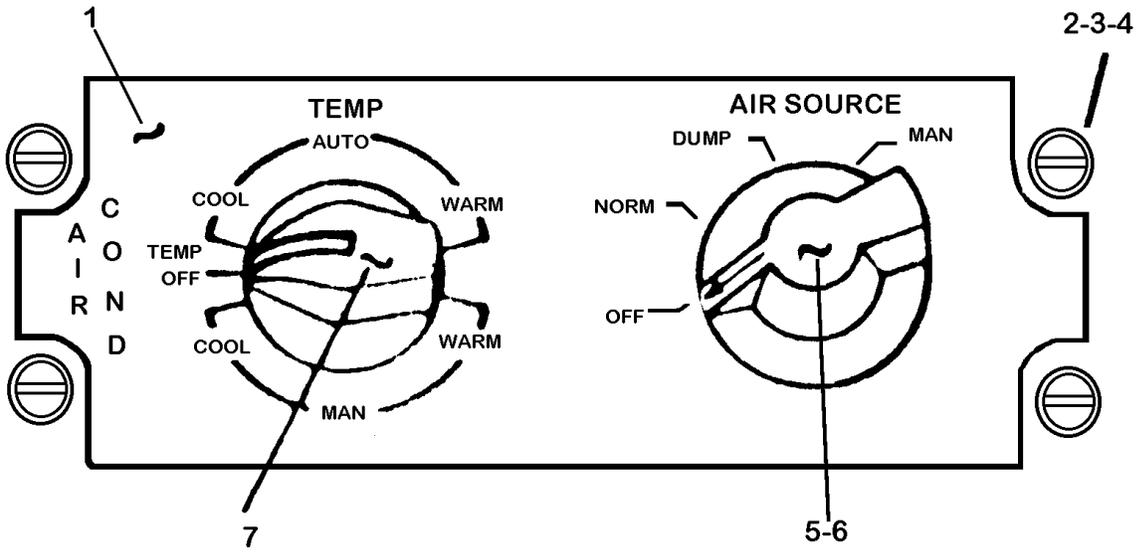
PANEL ASSEMBLY, AIR CONDITION CONTROL INSTALLATION.
